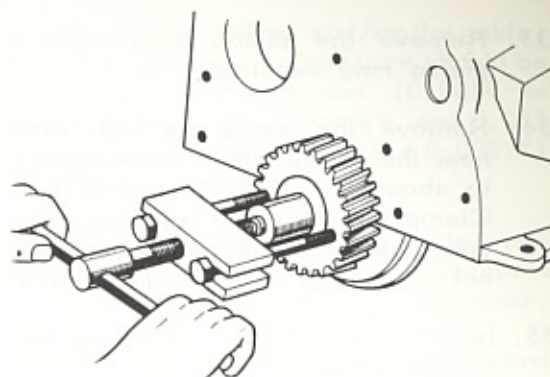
Crankshaft Timing Gear Removal X4927
